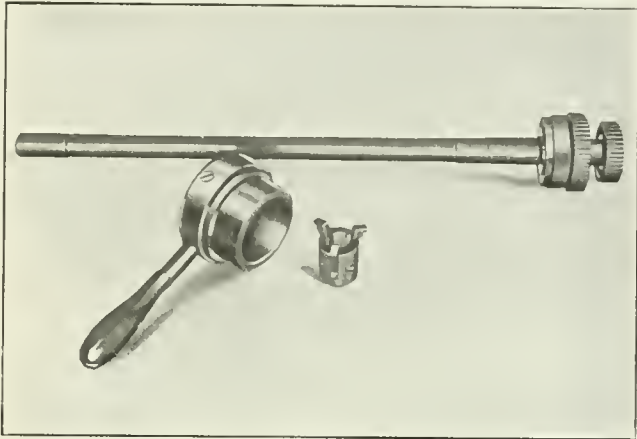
Muehlmann Mechanical Opening and Closing Spring Chuck Operator
